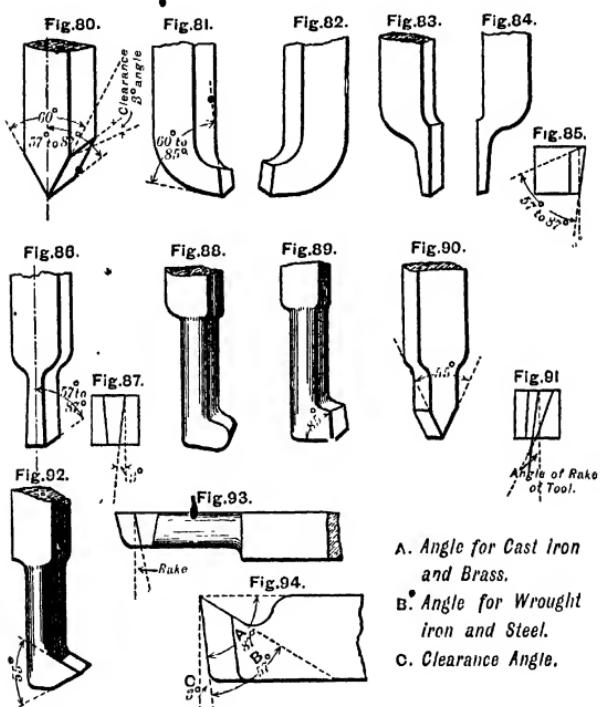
and 91.—Screwing tool (outside) for R H vee threads; the rake of which is determined by the pitch of the screw to be cut.
